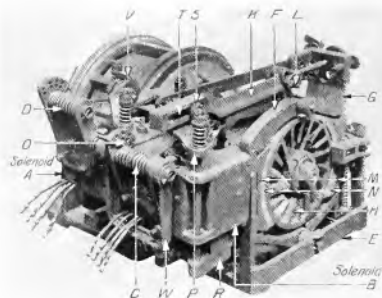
Alternating-current Solenoid Load Brake Mounted on a 15 h.p., 900 r.p.m. Wound rotor Induction Motor
